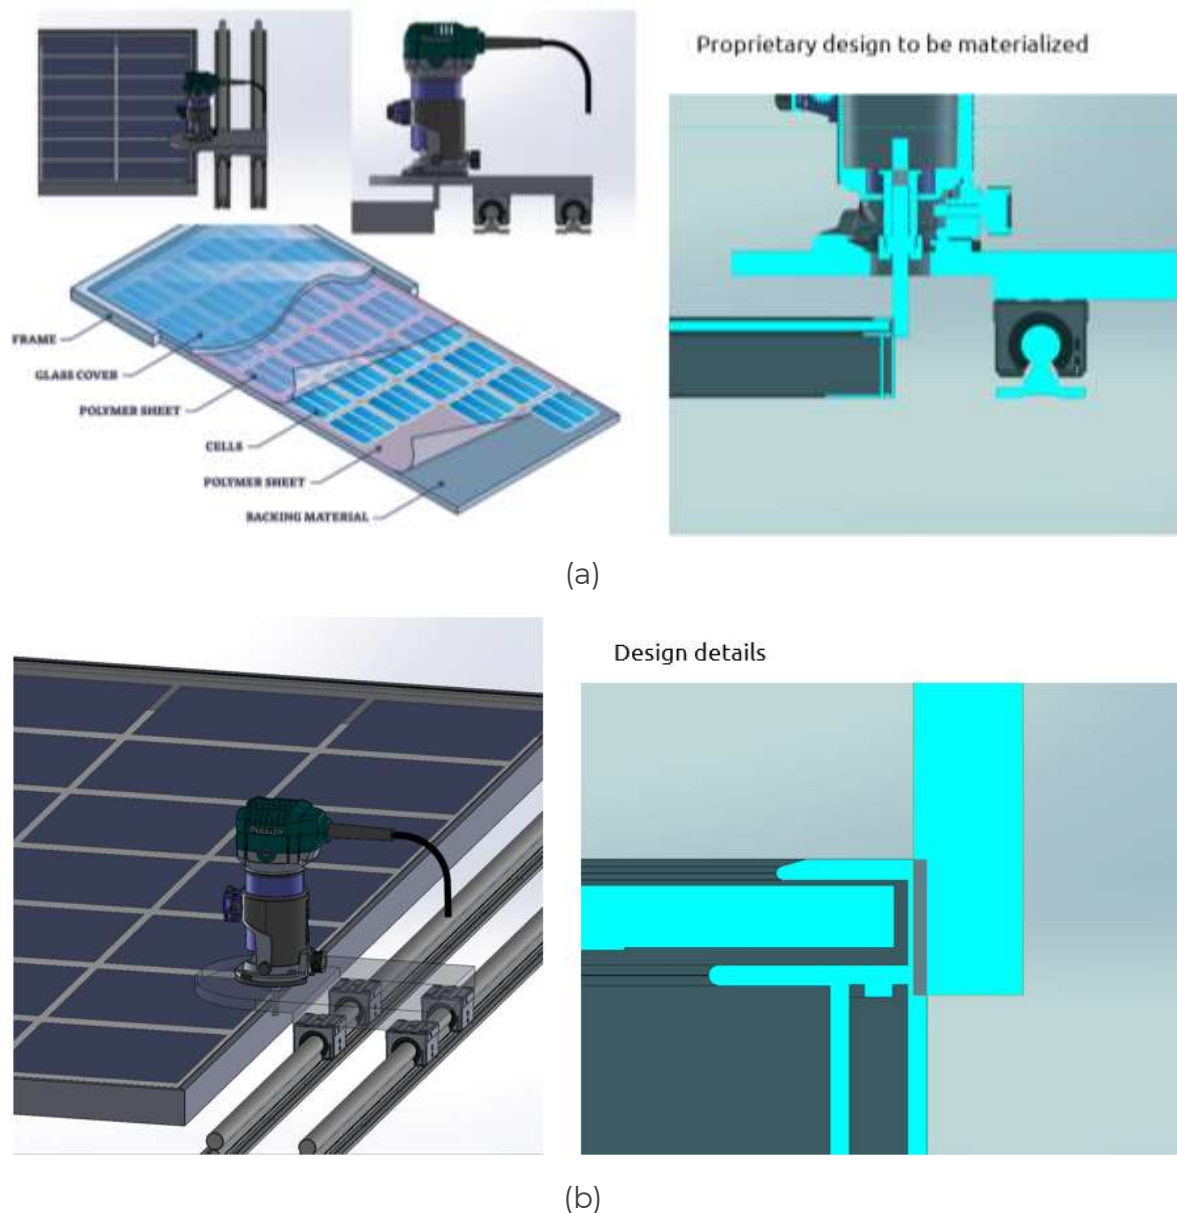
Frame Removal -CAD/CAM SolidWorks design of the frame removal prototype device
